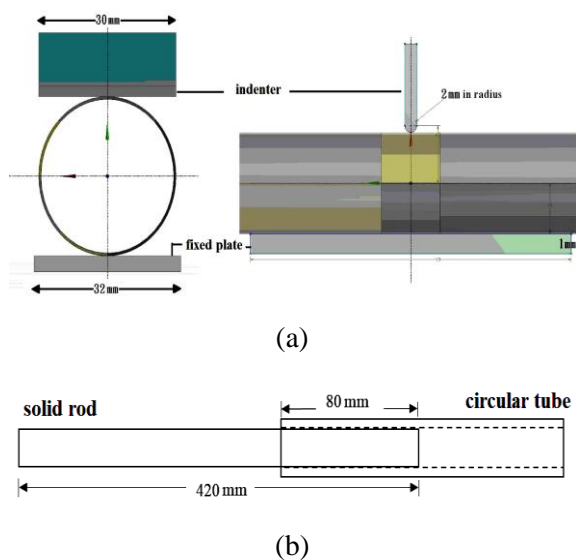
Schematic drawings of (a) the indenter and (b) solid rod.
